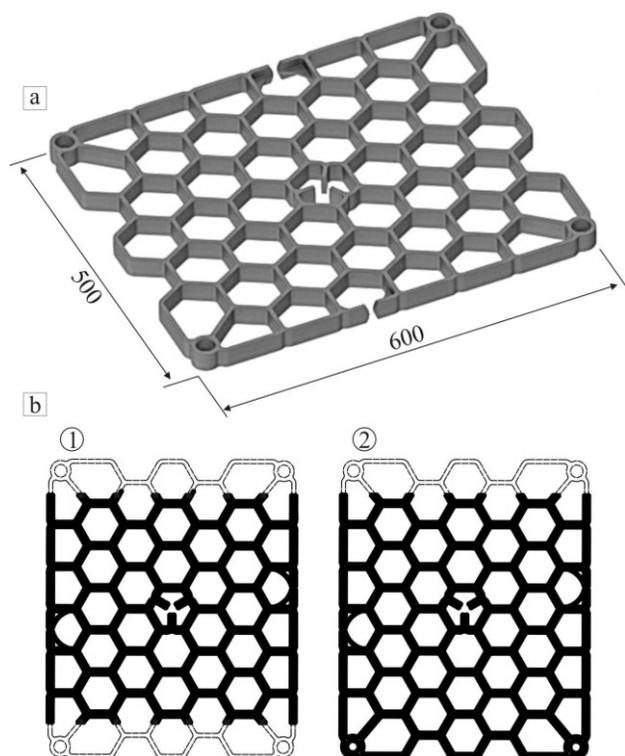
Rectangular grate: a) initial shape and dimensions, b) fragments of the base grate used for assembly
